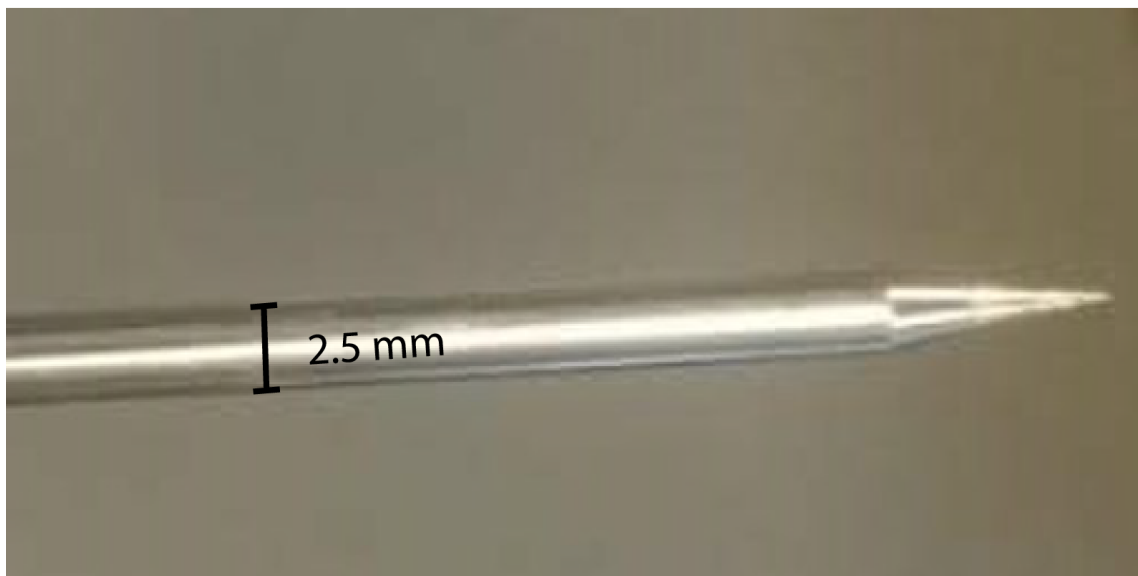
Proper cone shaped needle tip manufactured for the prototype
